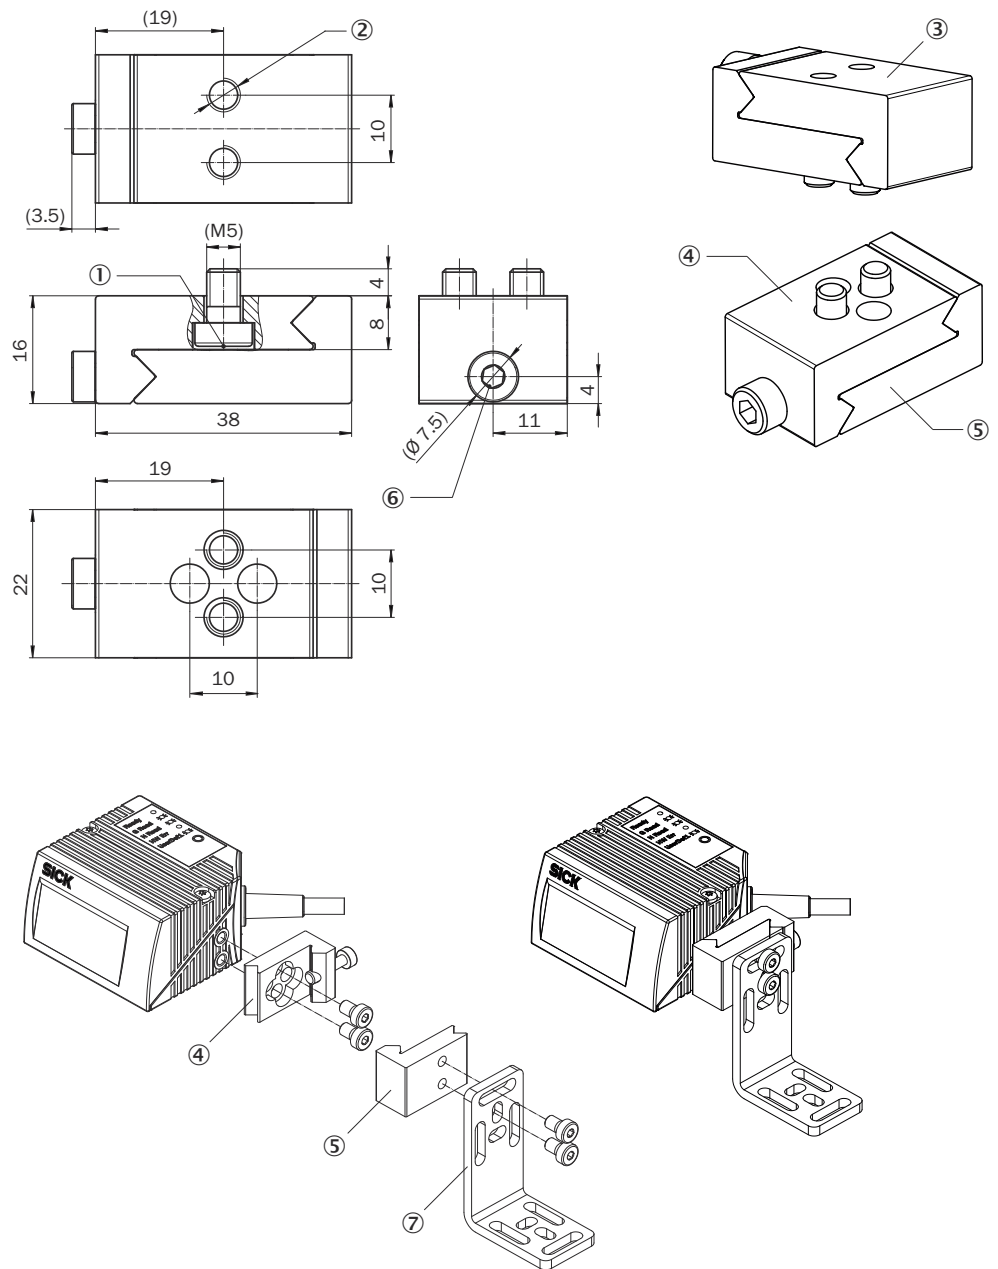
View of the quick release (dimensions in mm) and combination with mounting bracket
